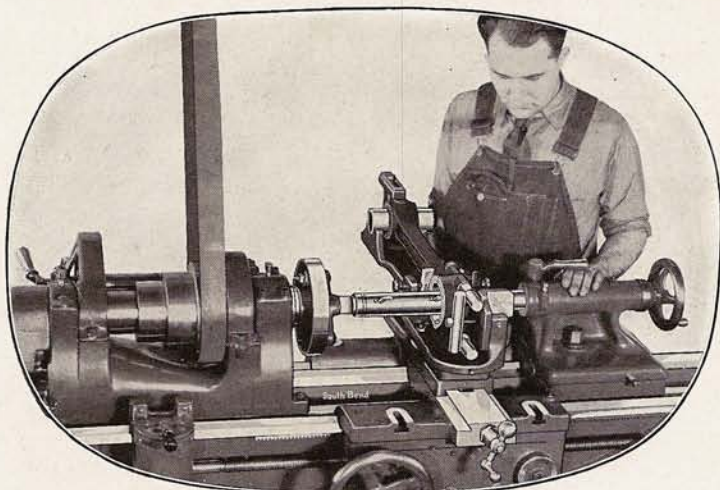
Boring a Rebabitted Connecting Rod in the 16-inch South Bend Lathe.
